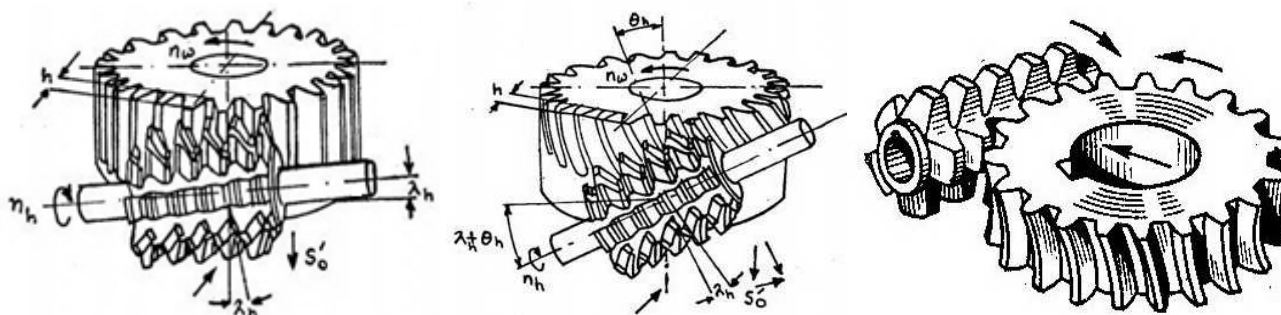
Generation of external gear teeth by hobbing (a) spur gear (b) helical gear and (c) worm wheel
